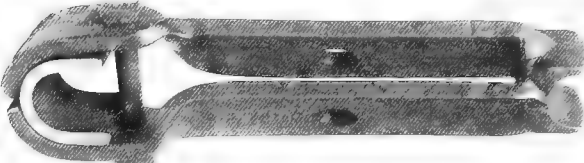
U-Section Forged Steel Fulcrum. Damascus Brake Beam Company.
